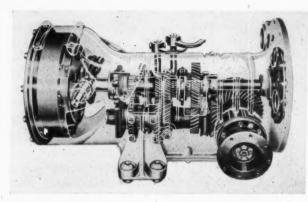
Sliding clutches place gears in driving connection in transmission, which has a right angle power take-off
